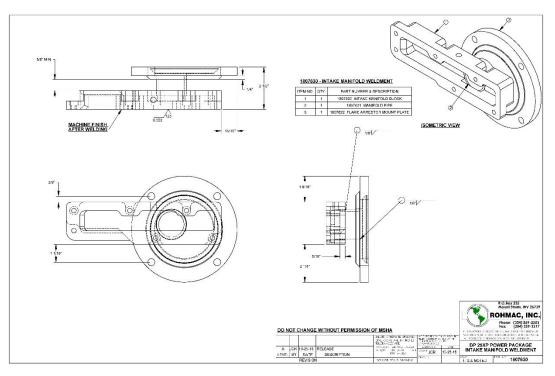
Revised Diesel Power Package Intake Manifold Weldment Drawing
